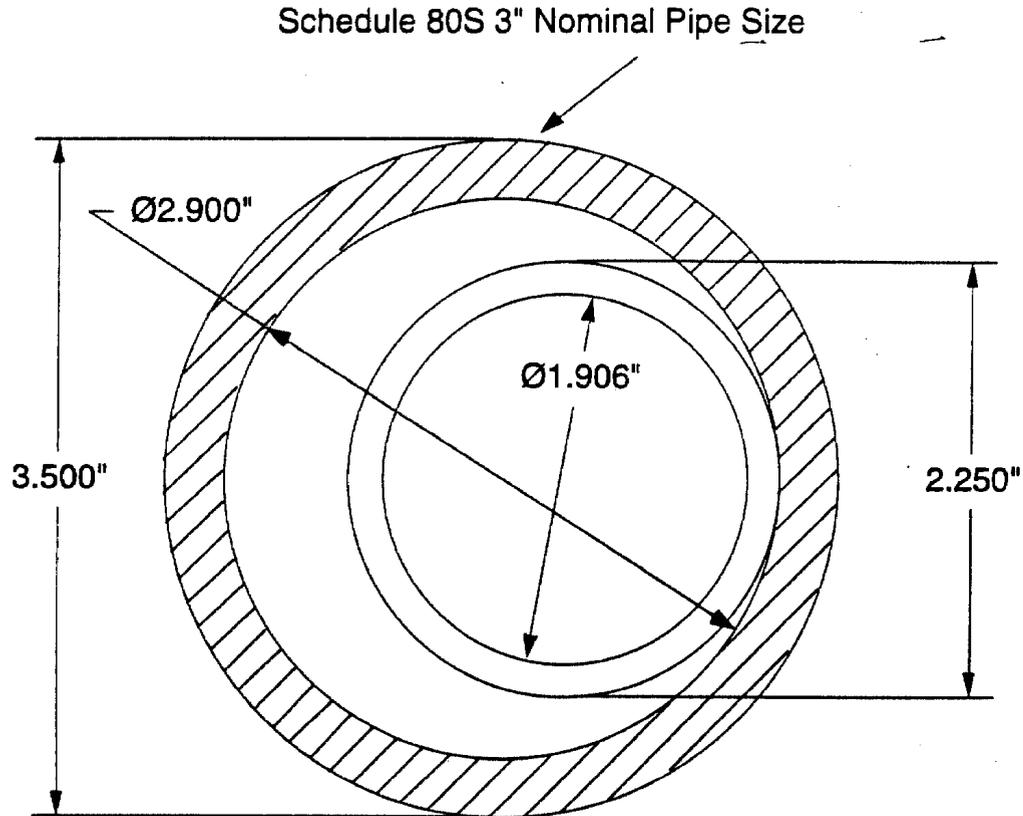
Cross-sectional view of the drill string in the conducting sleeve (to scale).
